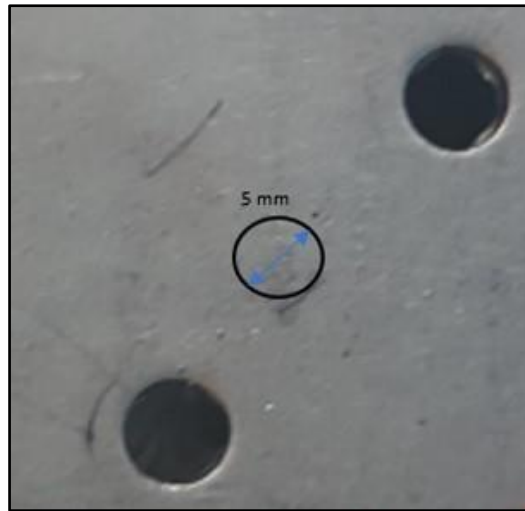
Test setup for 3 mm WSS-M1A365-A22 steel sheet material
